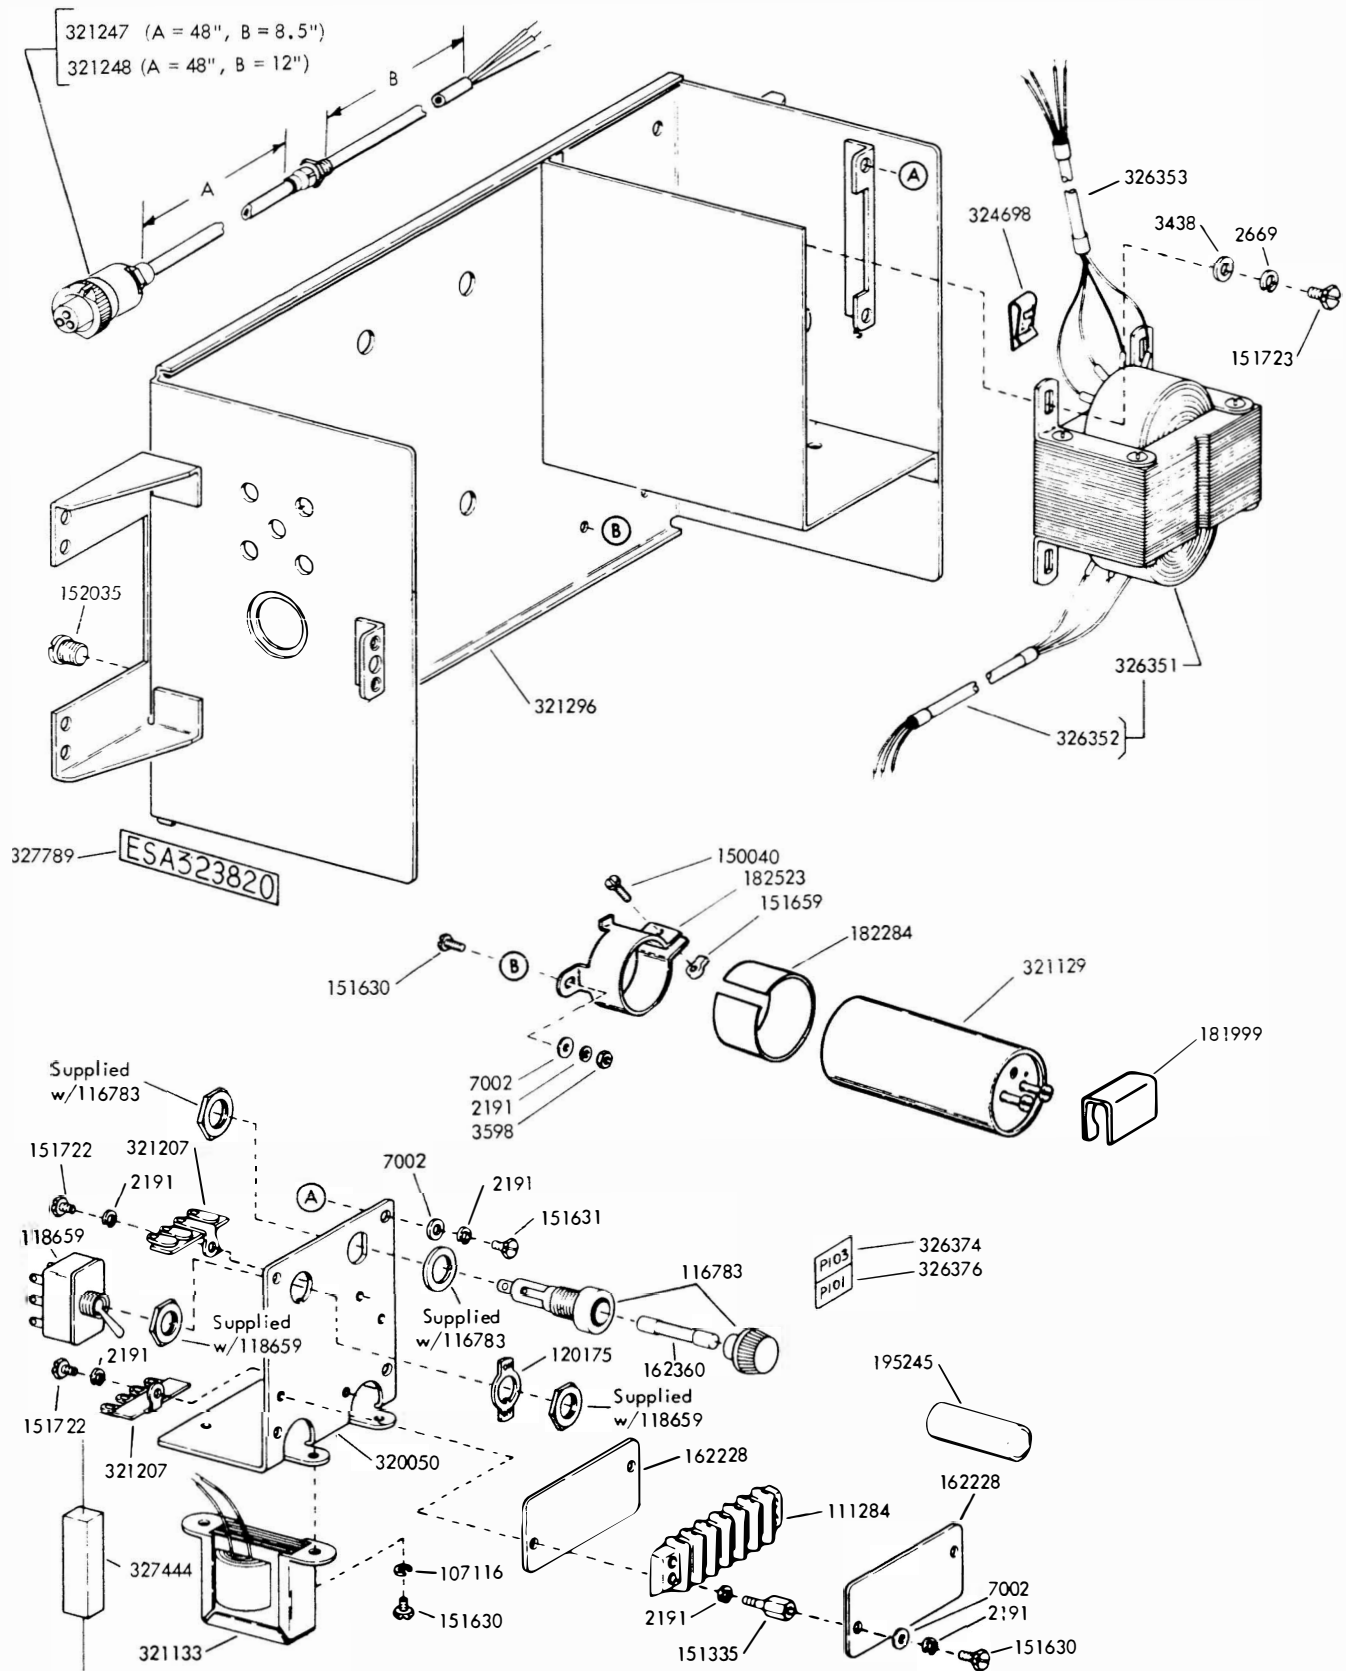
323820 ELECTRICAL SERVICE ASSEMBLY - Used w/KSR and RO Sets
